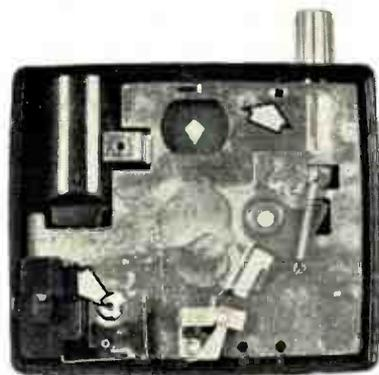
Back plate removed with arrows indicating screws requiring removal.
